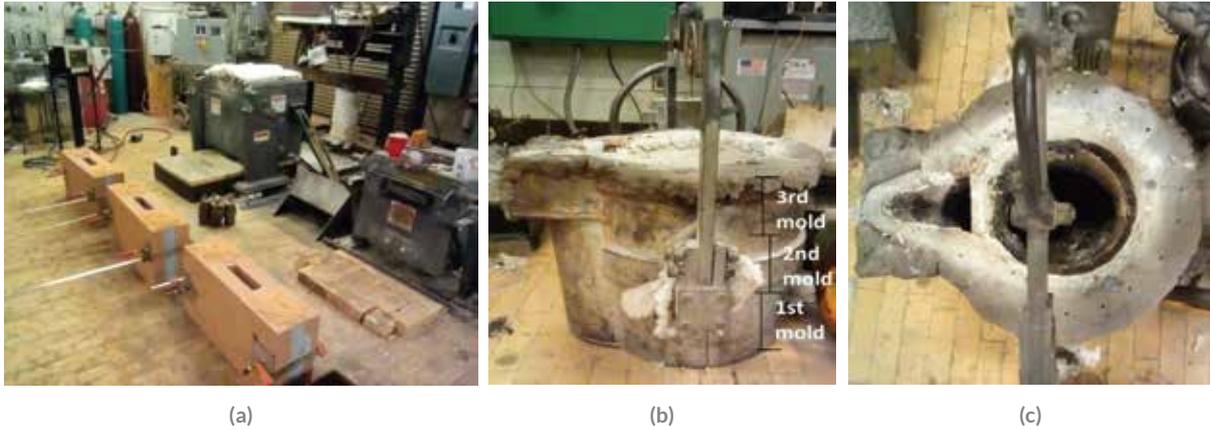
(a) Three mold sets, (b) 200 lbs teapot ladle (side view) and (c) 200 lbs teapot ladle (top view).
